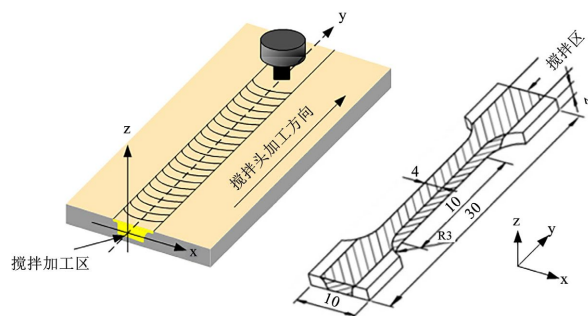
Sampling location and dimensions of tensile test specimens from friction stir welded aluminum alloy (Unit: mm)
